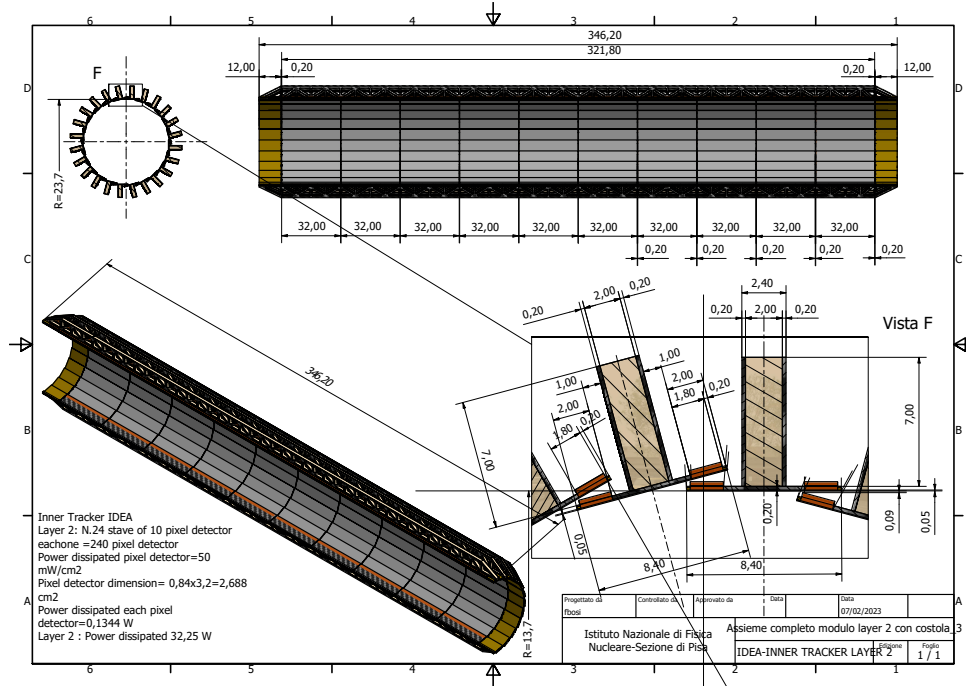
Second layer of the baseline inner vertex detector. The top drawings show the transverse (left) and longitudinal (right) cross sections of the assembly, shown in three dimensions on the bottom left drawing. An enlarged view showing the overlaps and the different structures is given in the bottom right drawing. All measures are in mm. MAPS sensors of $50\text{ }\mu\text{m}$ thickness are facing the centre of the structure. The brown structures are the buses, while the gold parts are the electronic hybrid circuits for readout.
